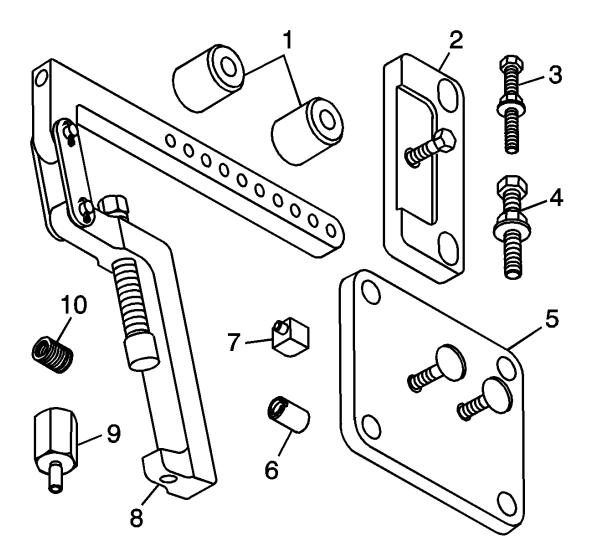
Identifying Rod Bearing Clearance Tool - Adapter Kit Courtesy of GENERAL MOTORS CORP.
